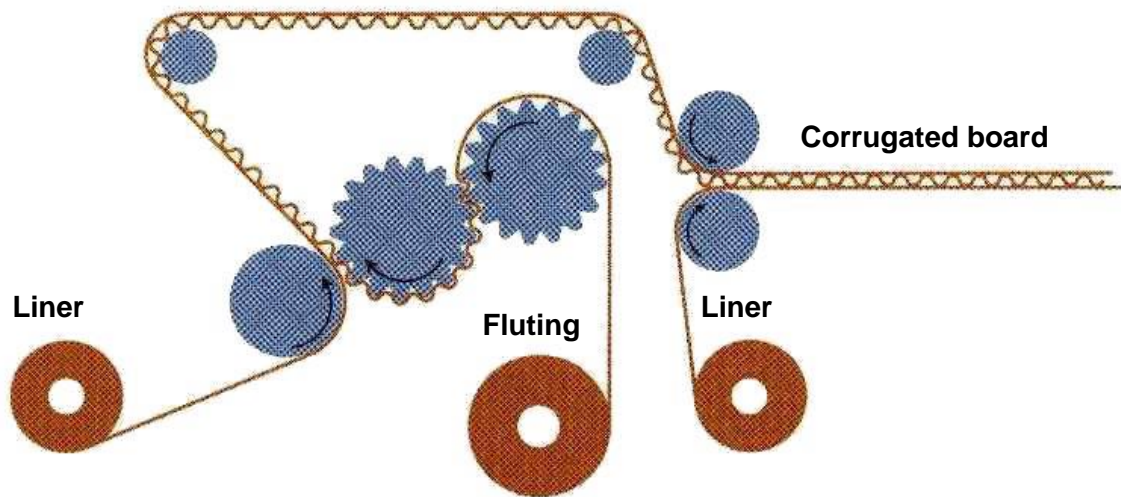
Manufacturing of a corrugated board (Allansson & Svard, 2001).
